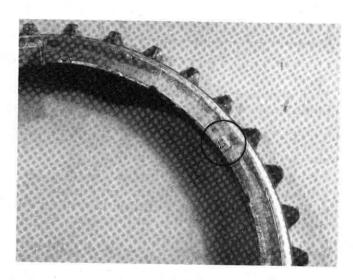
Blocker ring with small "B" imprinted on ring at small end of cone.
